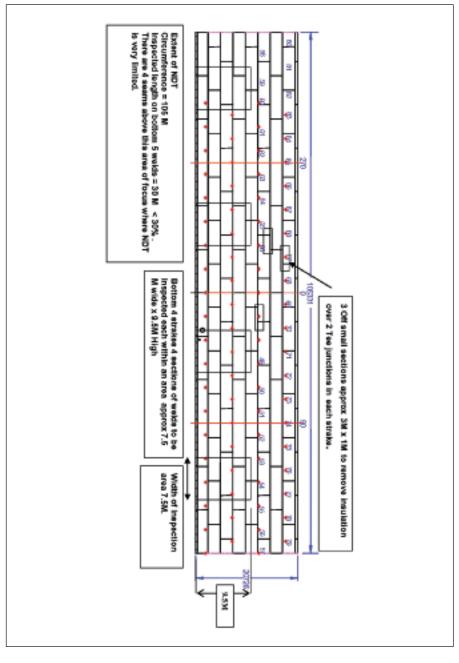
Outer surface of tank showing areas to be inspected by UT inspection method
